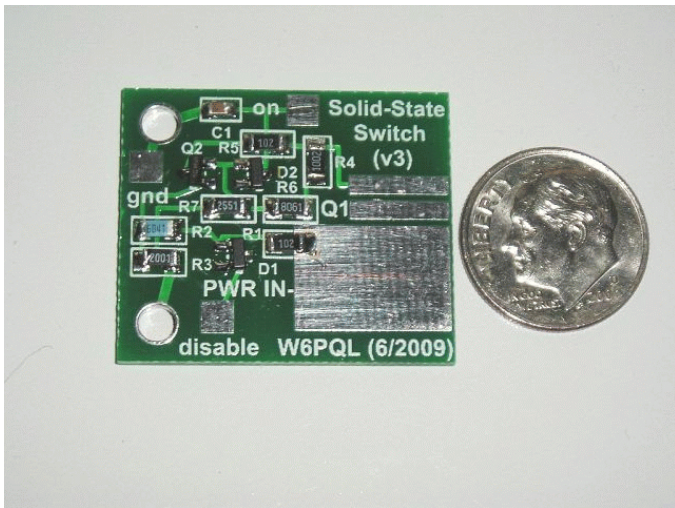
This PC board uses only surface-mount components. It was assembled using the methods described in this article.
